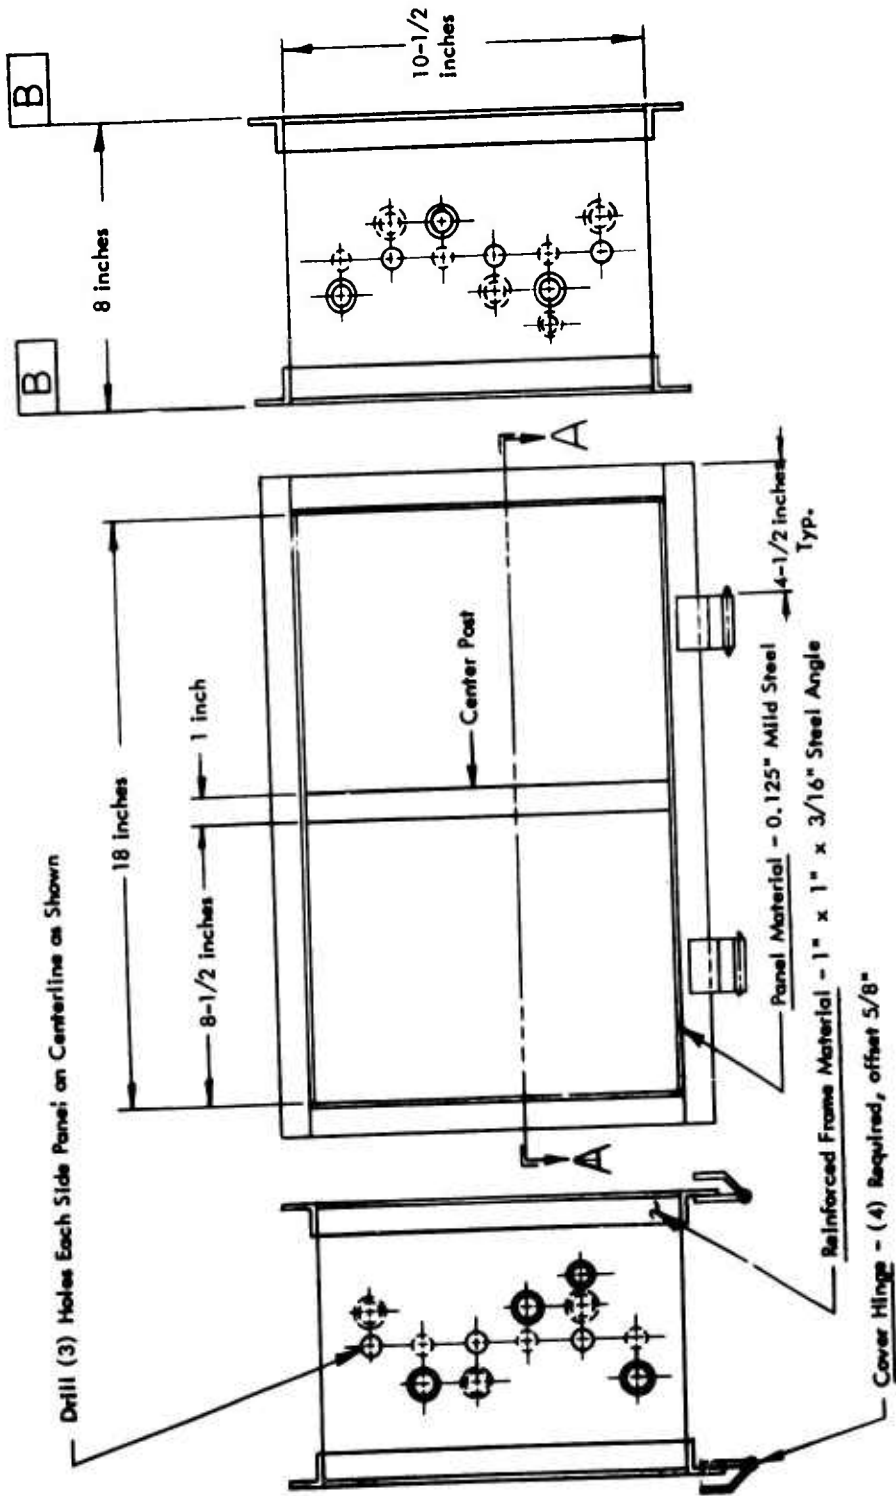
Typical Environmental Test Chamber, Front and Side Views, Covers Removed (Sized for -4 Hose).
